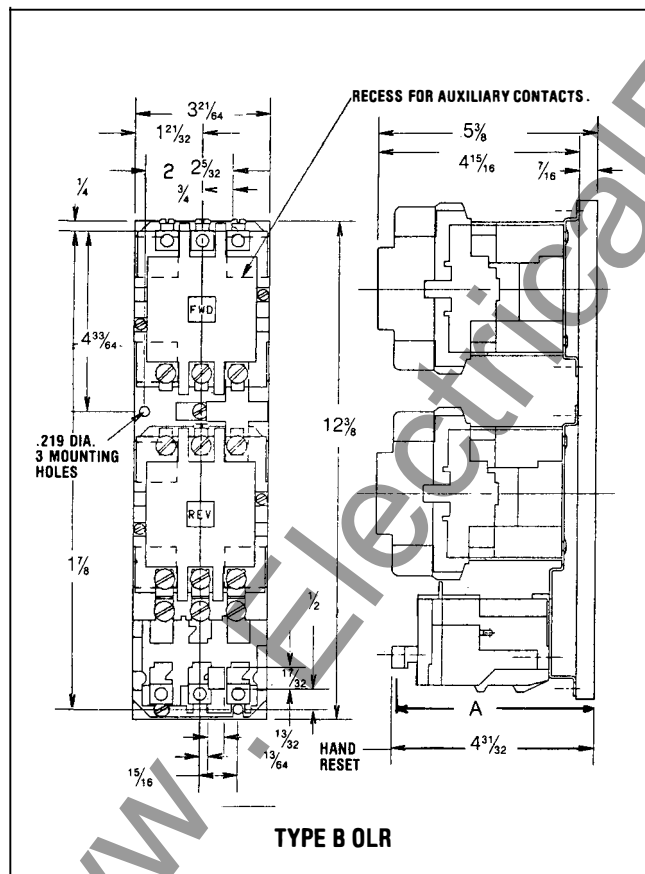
A250 Dimension Drawing (Dim. in inches)
